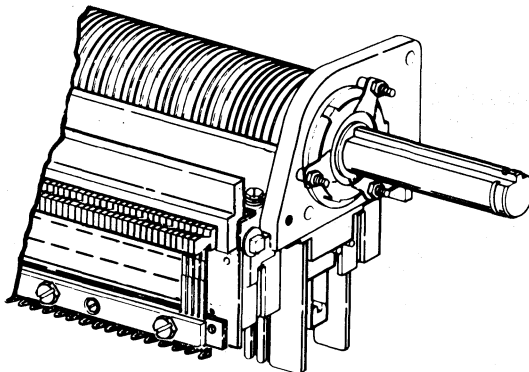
Print Head Assembly (Tractor Feed - 132-Column) (Late Design)
